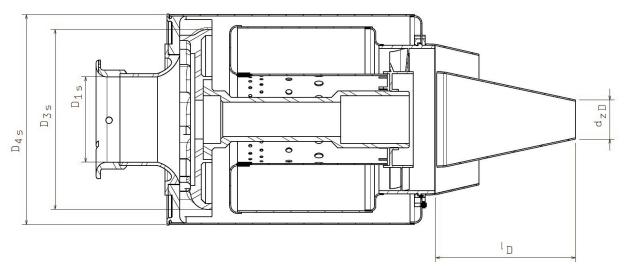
Basic dimensions of mSO-1 turbojet engine non rotating parts
